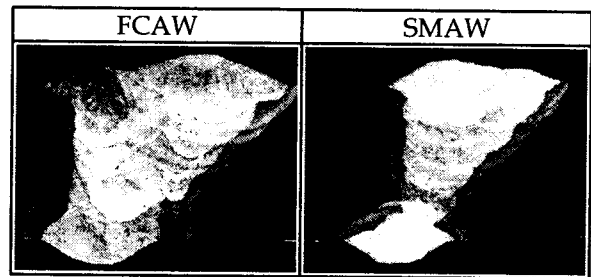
Macrographs of welded low carbon A387-22 with FCAW and SMAW.
